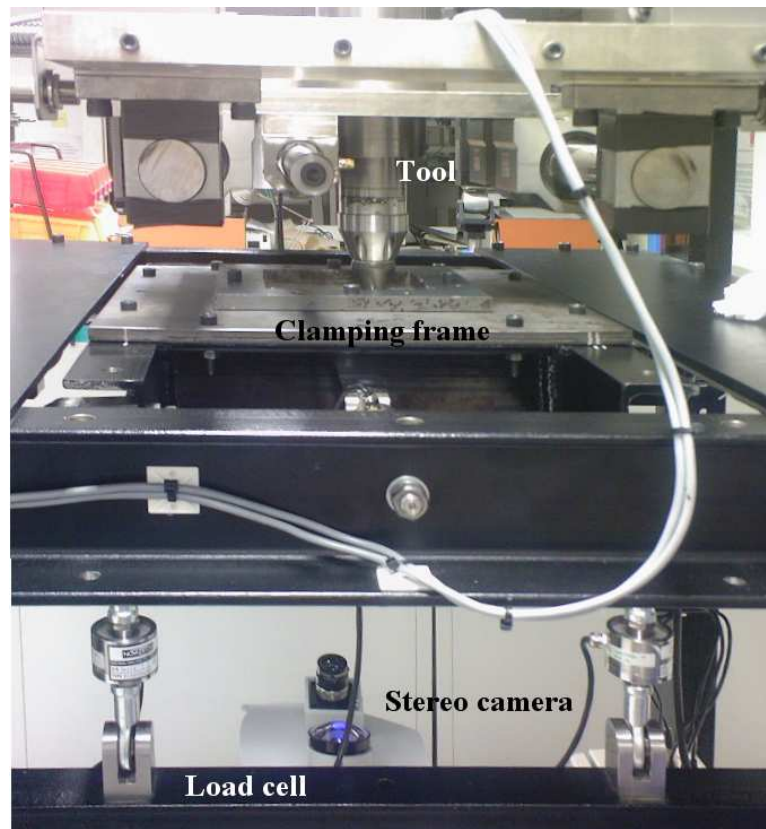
Side view of the ISF machine with a stereo vision camera in place.
